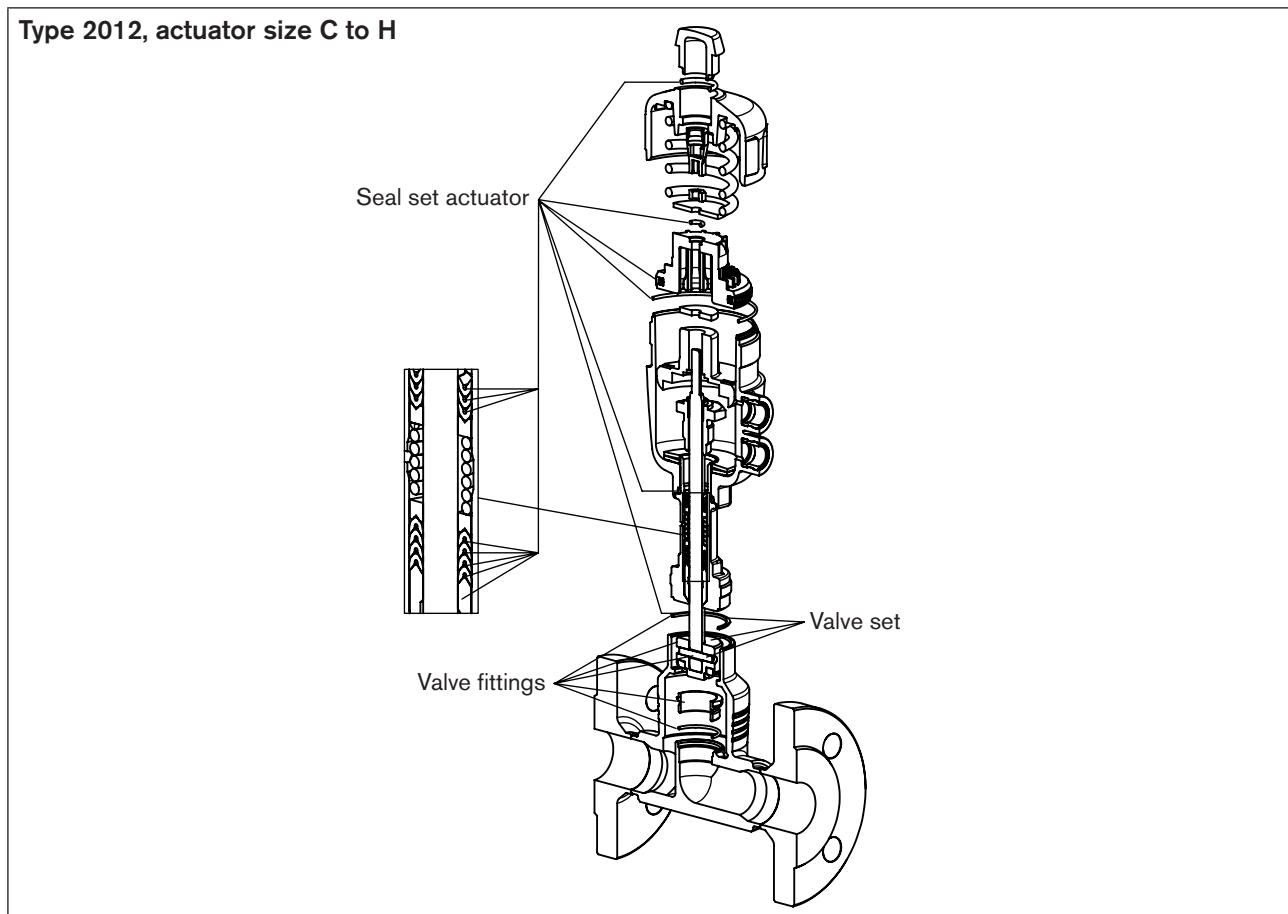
Replacement part sets Type 2012, actuator size C to H (40–125 mm)
